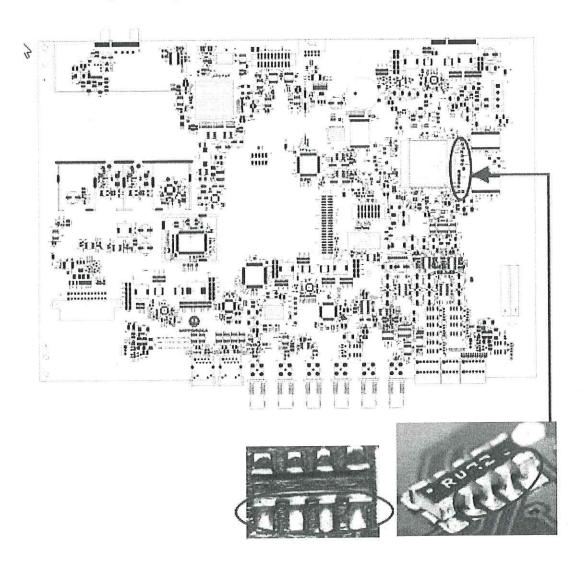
PCBA Drawing/ Lay-out & Non-wetting Defect Photos
